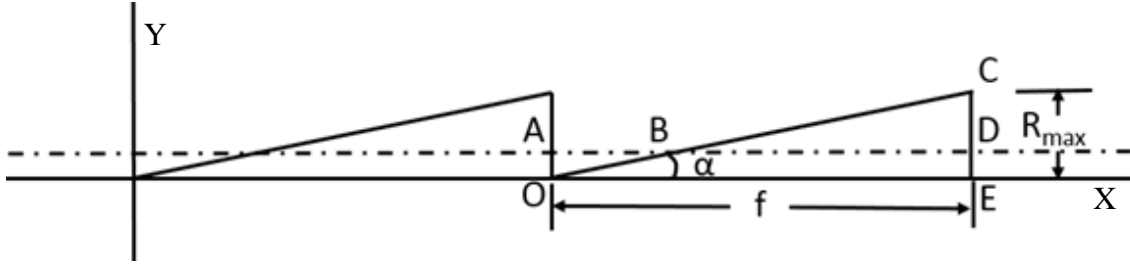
Geometrical sketch representing simulated surface of a flat end mill
